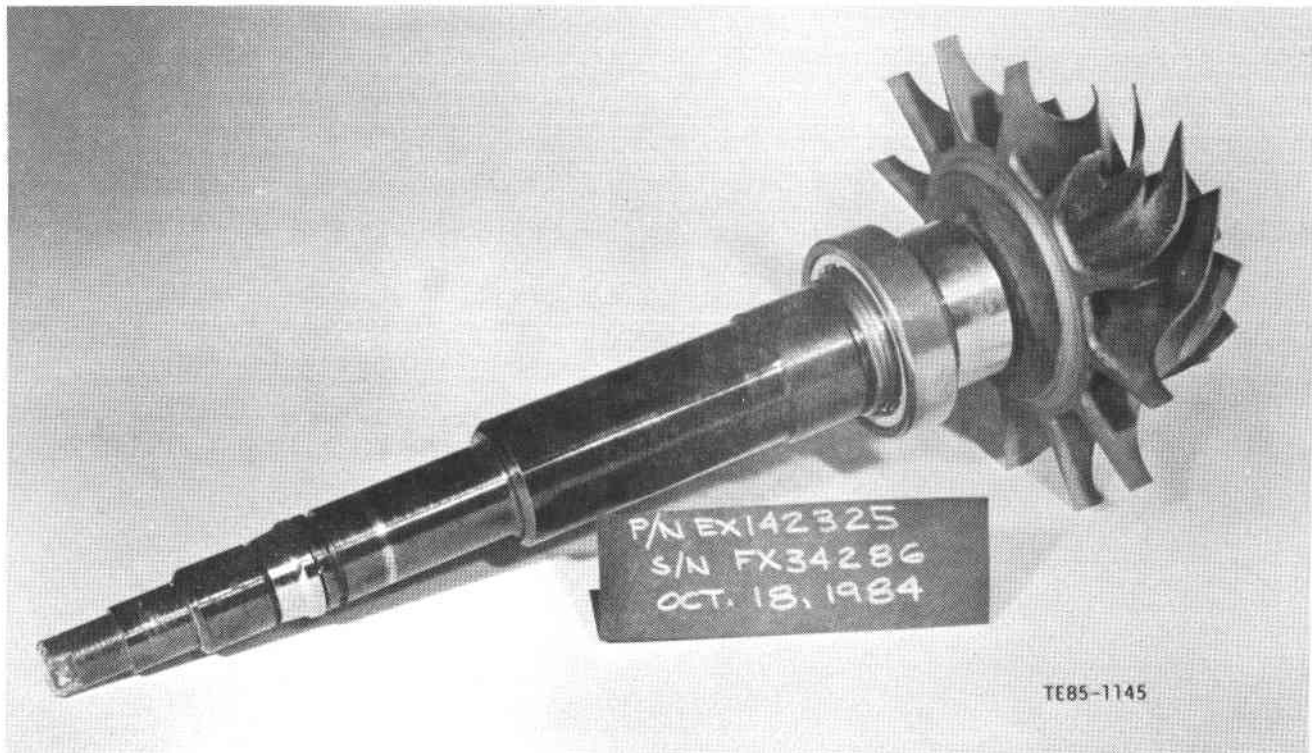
Finish-machined engine candidate rotor assembly prepared for proof clearance spin test.
